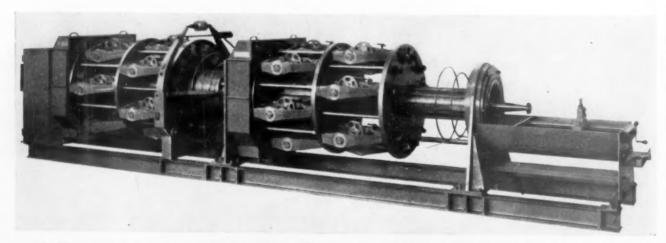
Watson 25 bobbin Tubular High Speed Strander, for laying strand in single operation. Capstan and take-up not shown, these being separate units. Photo by courtesy of the Watson Machine Company, Patterson, N. J.
